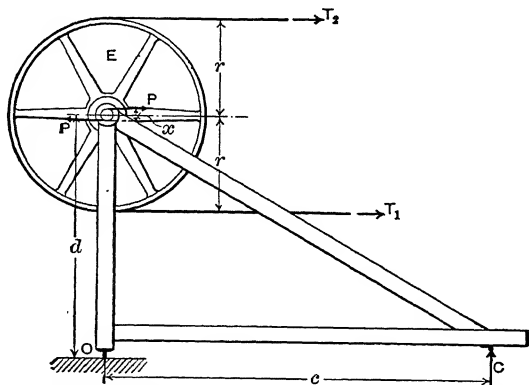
TENSION CARRIAGE, BELT-TESTING MACHINE.
